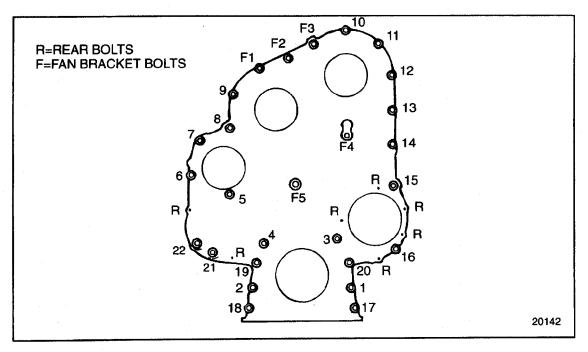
Gear Case Cover Bolt Torque Sequence (Front)
